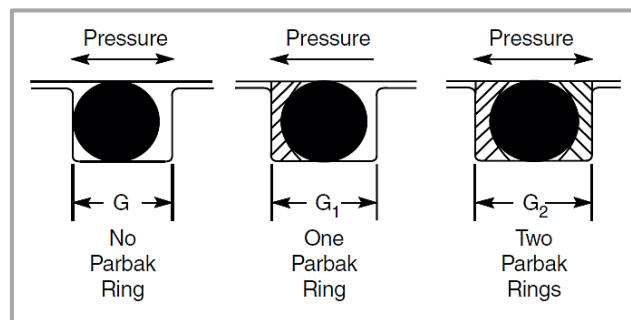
Static O-ring seals showing anti-extrusion back-up ring configuration options [32]
